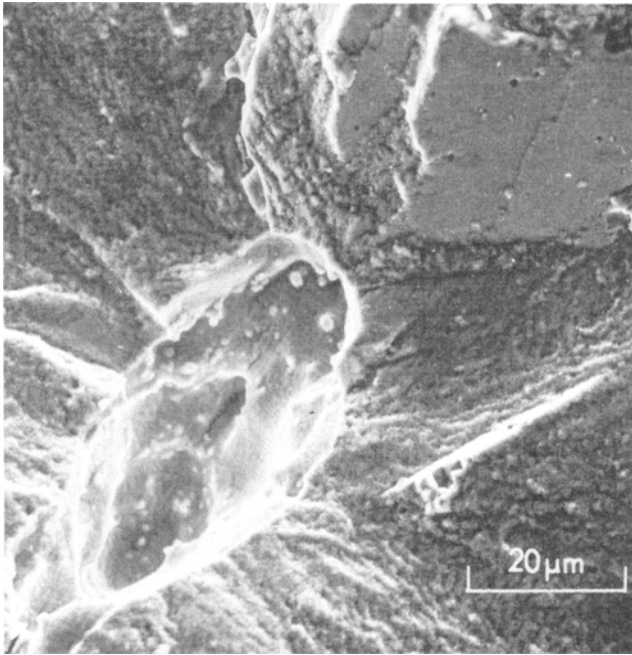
Stage I facet at the edge of an internal defect as viewed on the fracture surface.
